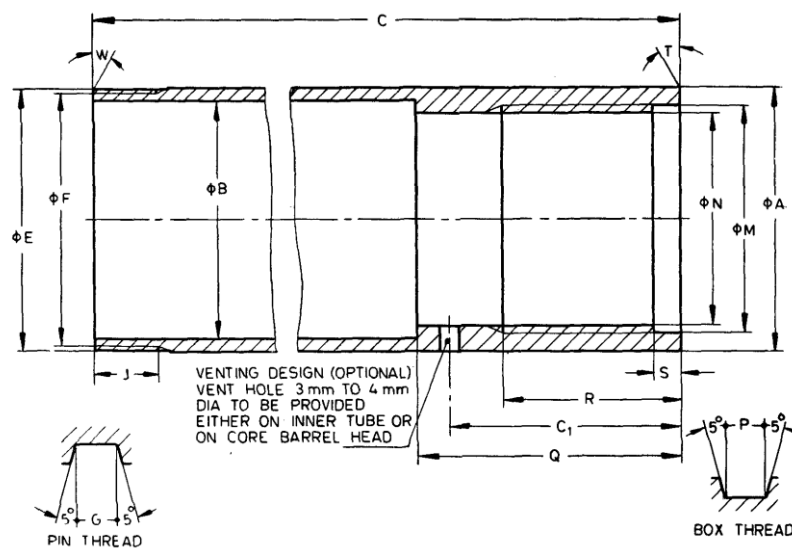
'WM' DESIGN DOUBLE TUBE CORE BARREL — OUTER TUBE
